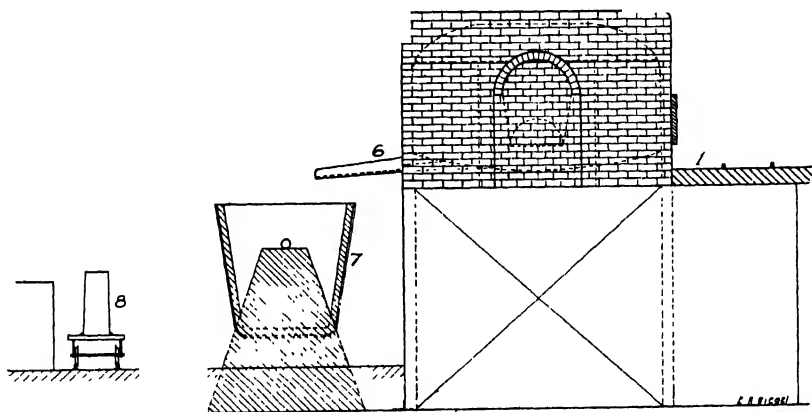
Side view (elevation) of the open hearth furnace, showing the relative location of working floor 1; tapping trough 6; ladle 7, and ingot mold 8.
